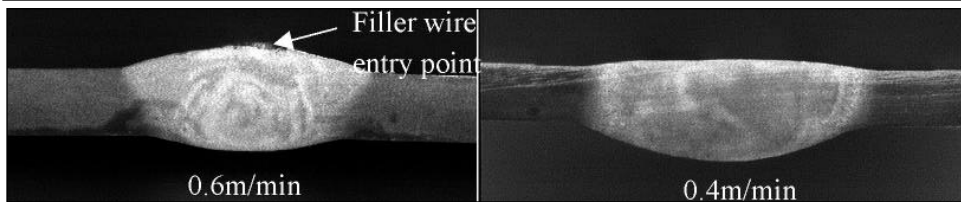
Cross sections of butt welds made in 1.6mm 2014 with 5356 filler wire at travel speed of 0.6 and 0.4m/min.
